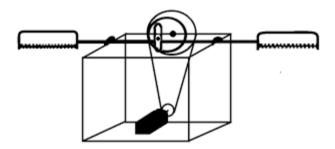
Scotch yoke mechanism for hack-saw cutting operation
